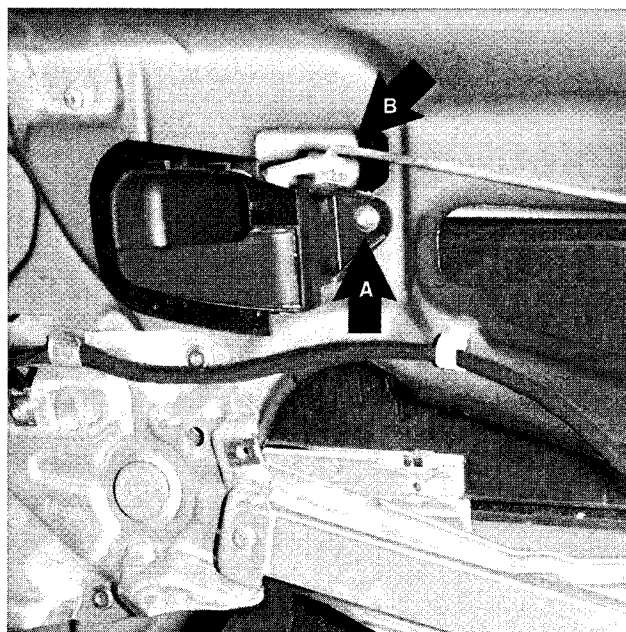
Inside door handle retaining screw (A) Unhook linkage from handle at B.
